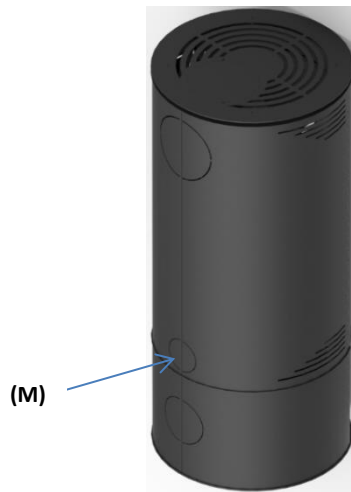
Rear view of the equipment; (M) section to remove for external air inlet
